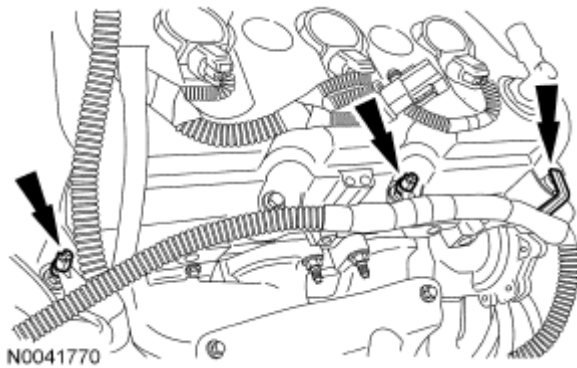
Locating Wiring Harness Retainers From Valve Cover Stud Bolts
